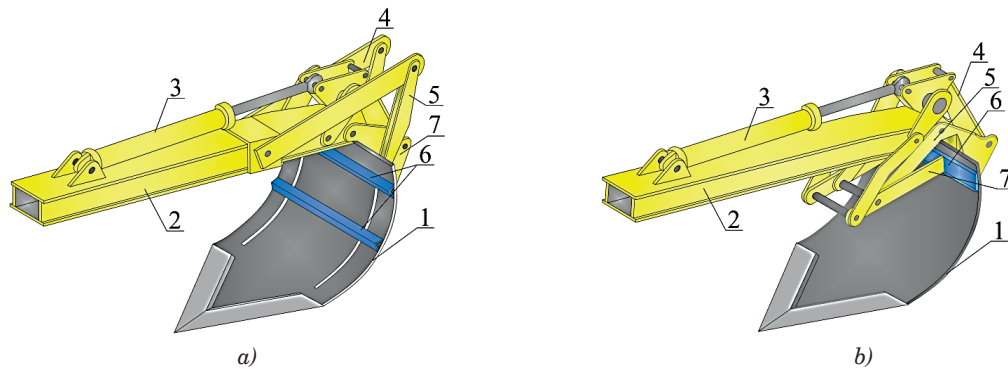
Excavator working equipment: a) with two cleaning devices; b) with one cleaning device; 1 - bucket; 2 - handle; 3 - hydraulic cylinder; 4 - linkage system; 5 - tie rod; 6 - tie rod; 7 - cleaning frame
